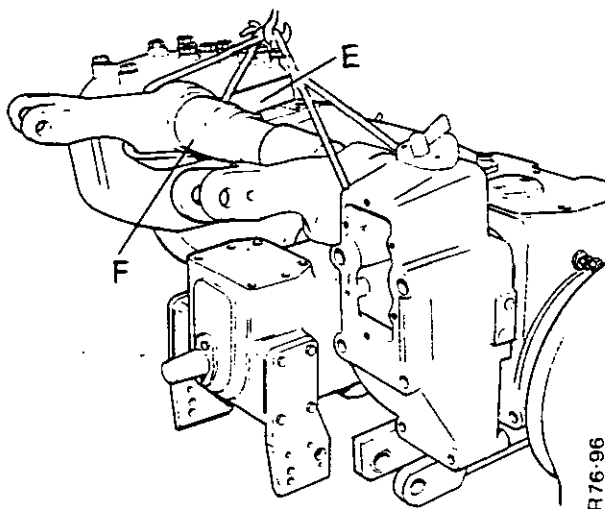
REMOVAL OF THE RAMSHAFT AND RAMSHAFT BRACKETS
